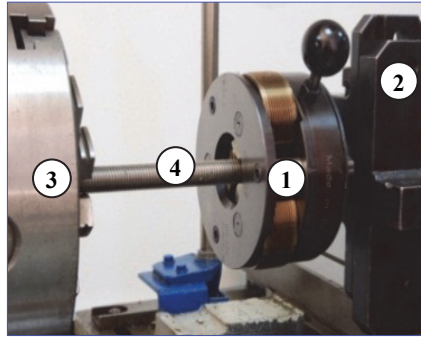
View of working stand for the axial thread rolling method by angle head type F3 (FETTE): 1 – head, 2 – grip holder, 3 – jaw chuck, 4 – rolled rod
